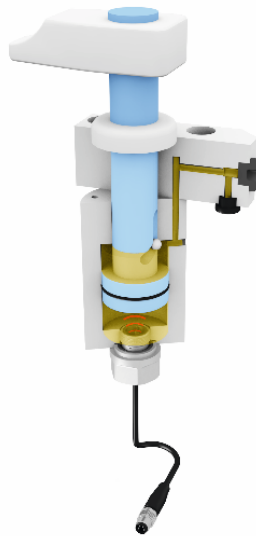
Swing clamping cylinders: The ultrasonic position sensor is attached to the end face. The piston is equipped with a hammer to clamp the workpiece.
